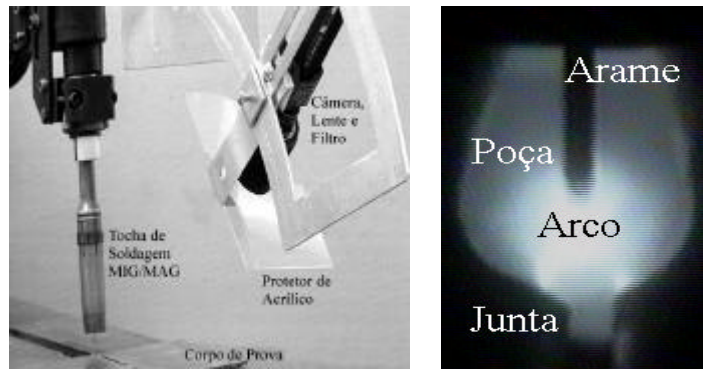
Vision based welding at GRACO (Alfaro, 1999).
